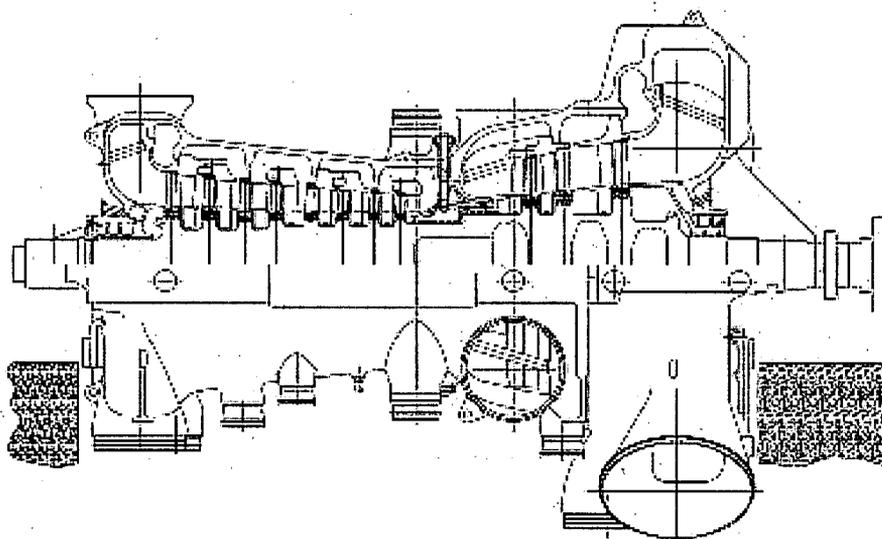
Cross section of the welded HIP rotor for UNISTAR
